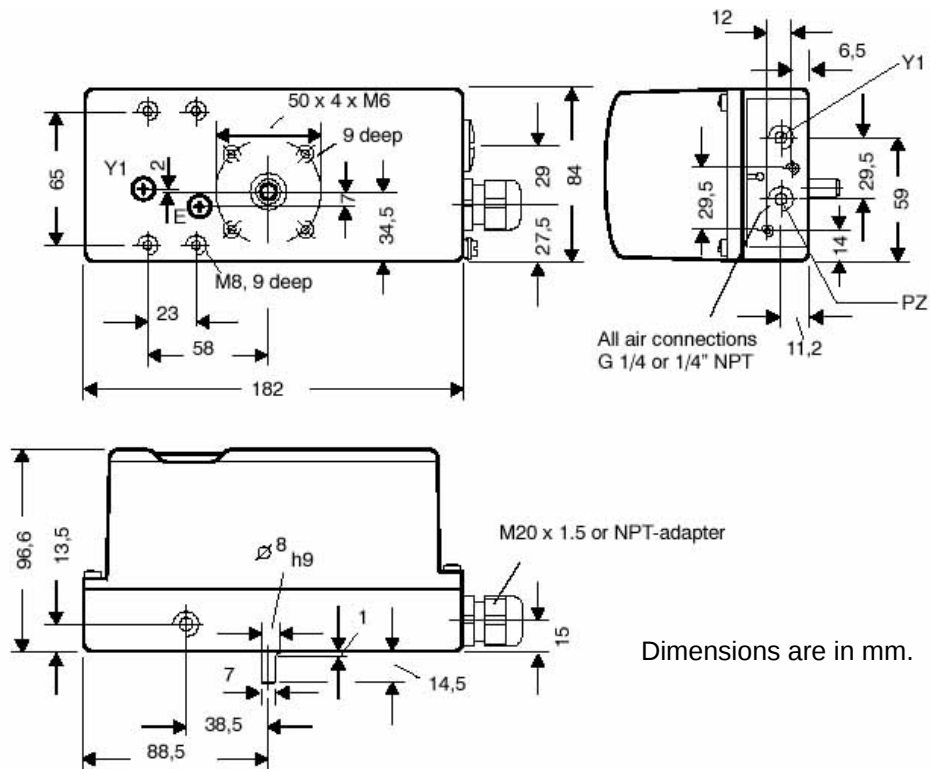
PS2 Dimensions, Aluminum Enclosure
